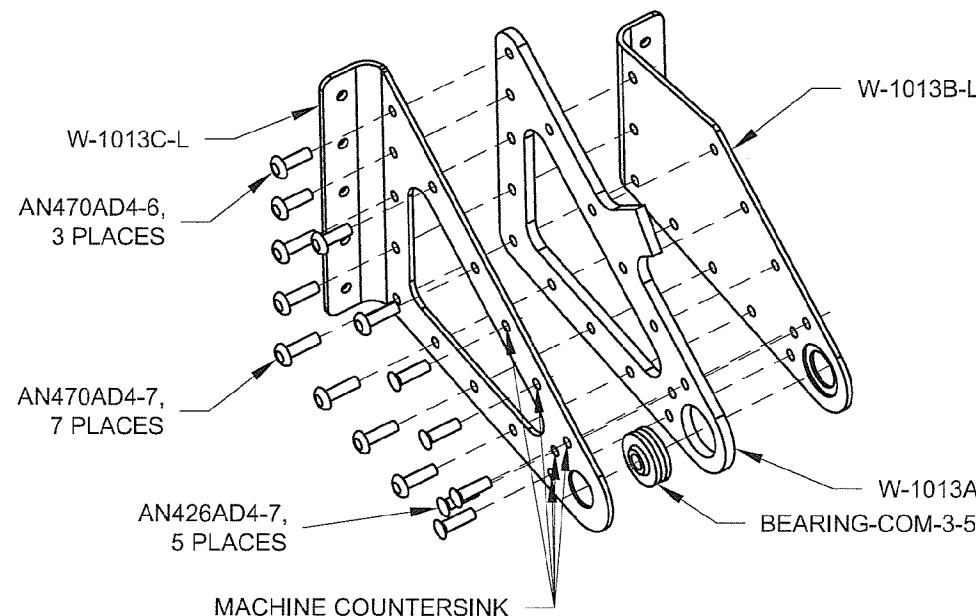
INBOARD AILERON BRACKET ASSEMBLY
